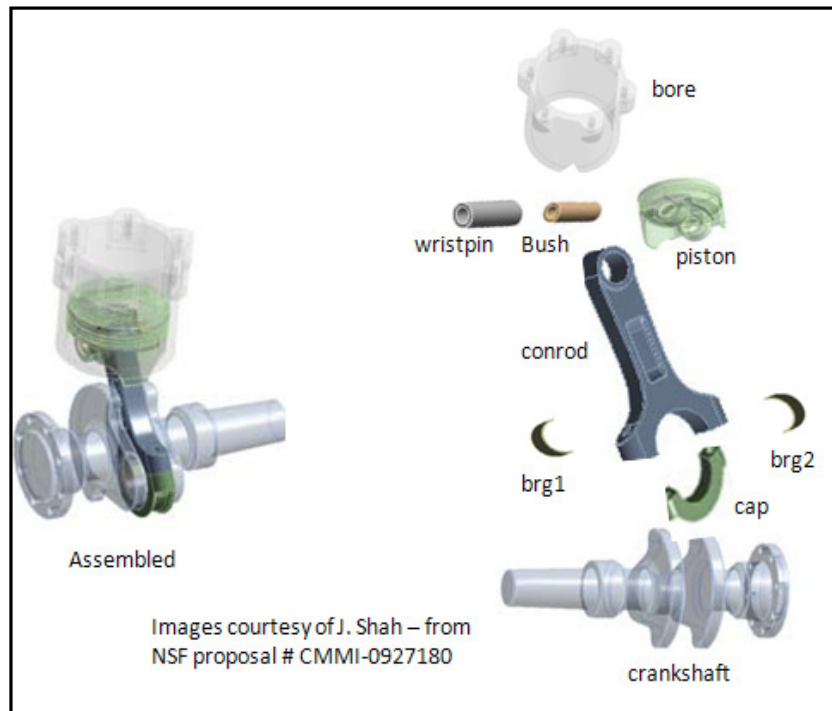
Unexploded (left) and exploded view of engine assembly
